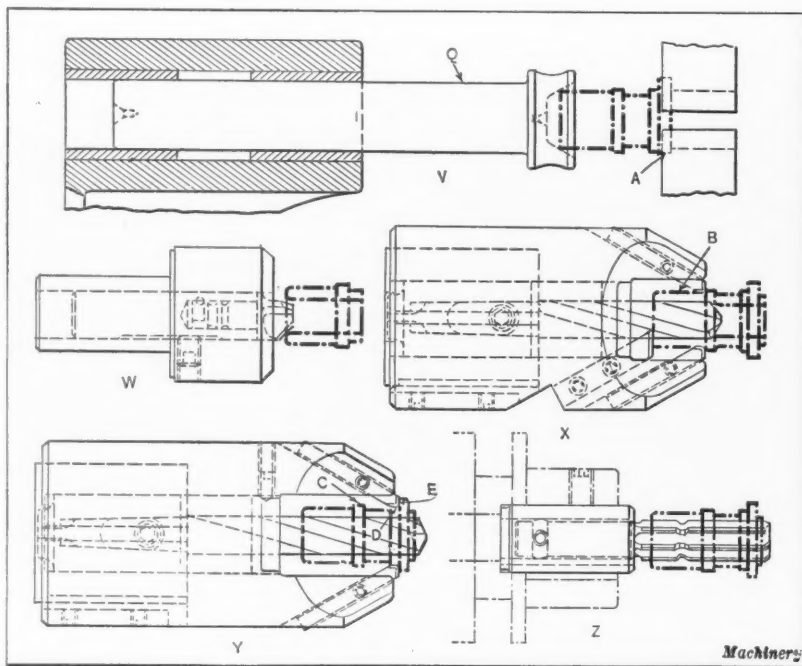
Tooling Equipment for the First Operation on the Valve Tappet Guide
